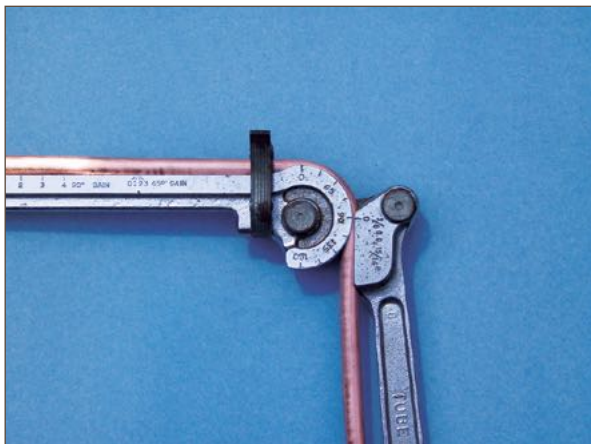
Bending Using a Lever-Type Hand Bender (tool shown is appropriate for use with annealed tube only)
